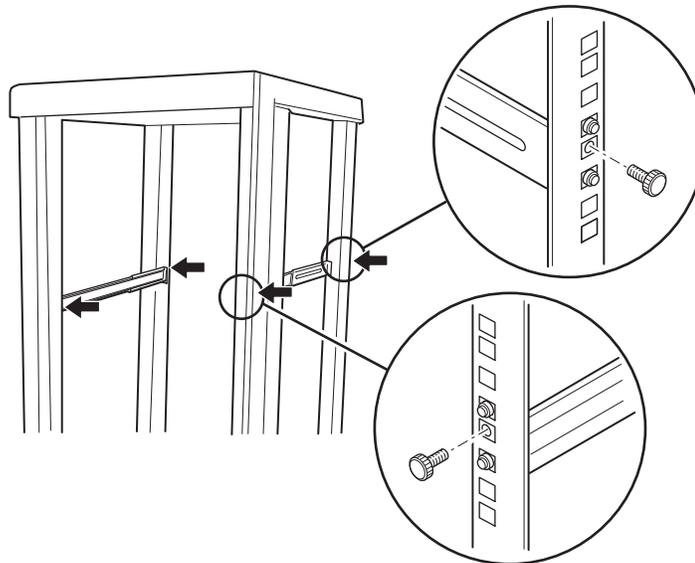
Marking the Mounting Holes for the SRS4 on the Front of the Rack
